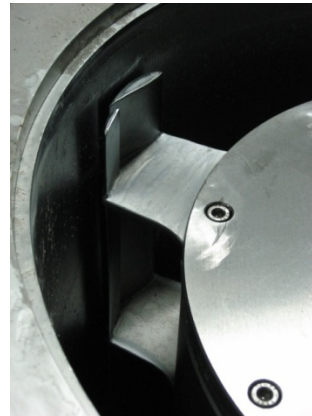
A photograph of the installed prototype AFT MEF™ Rotor. The main foil and flap can be seen next to a screen cylinder.
